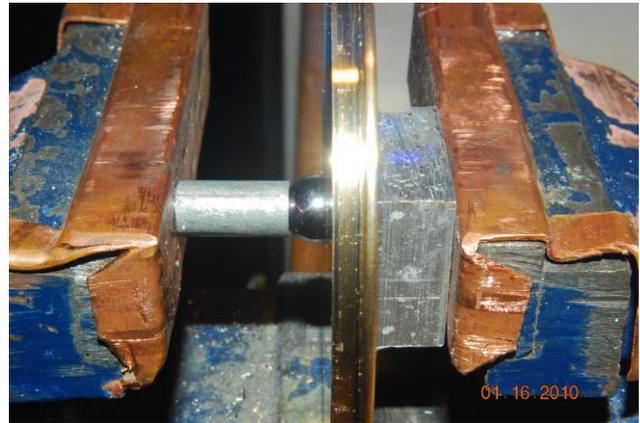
The metal block to the right of the flange has a 1/2 inch hole through it to receive the ball after it passes through the flange. Make sure the pusher is straight. The pusher should be short to reduce the tendency to twist.
